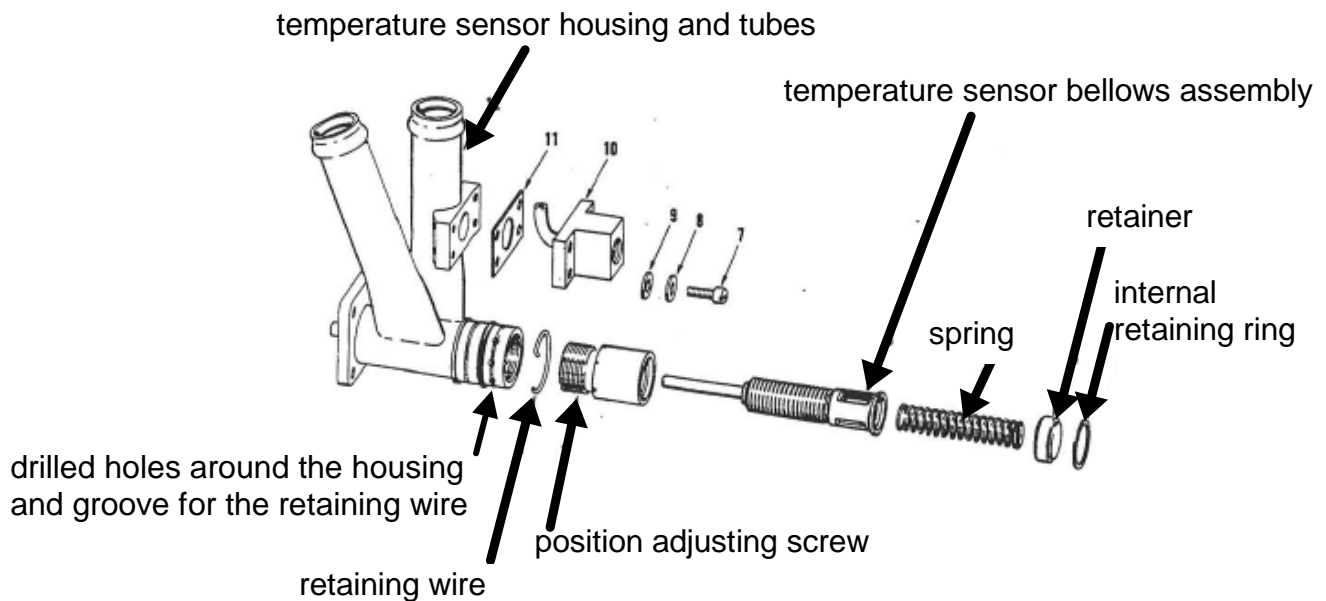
Diagram of the aspirator assembly showing greater detail than shown in figure 1.
